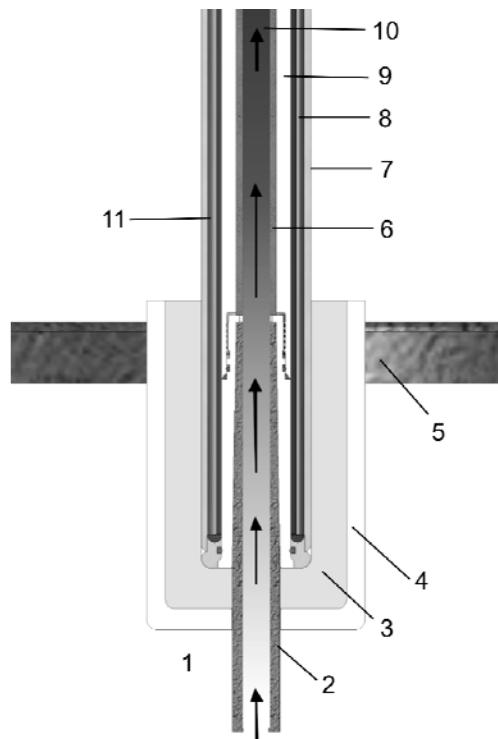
Scheme of upwards continuous casting of metals, /13/: 1-liquid metal; 2-graphite casting die; 3-heat insulating wadding; 4-graphite-fireclay cup; 5-furnace crucible; 6-graphite bushes; 7-external mould pipe; 8-intermediate pipe; 9-internal copper mould pipe; 10-cast metal profile; 11-cooling water.
